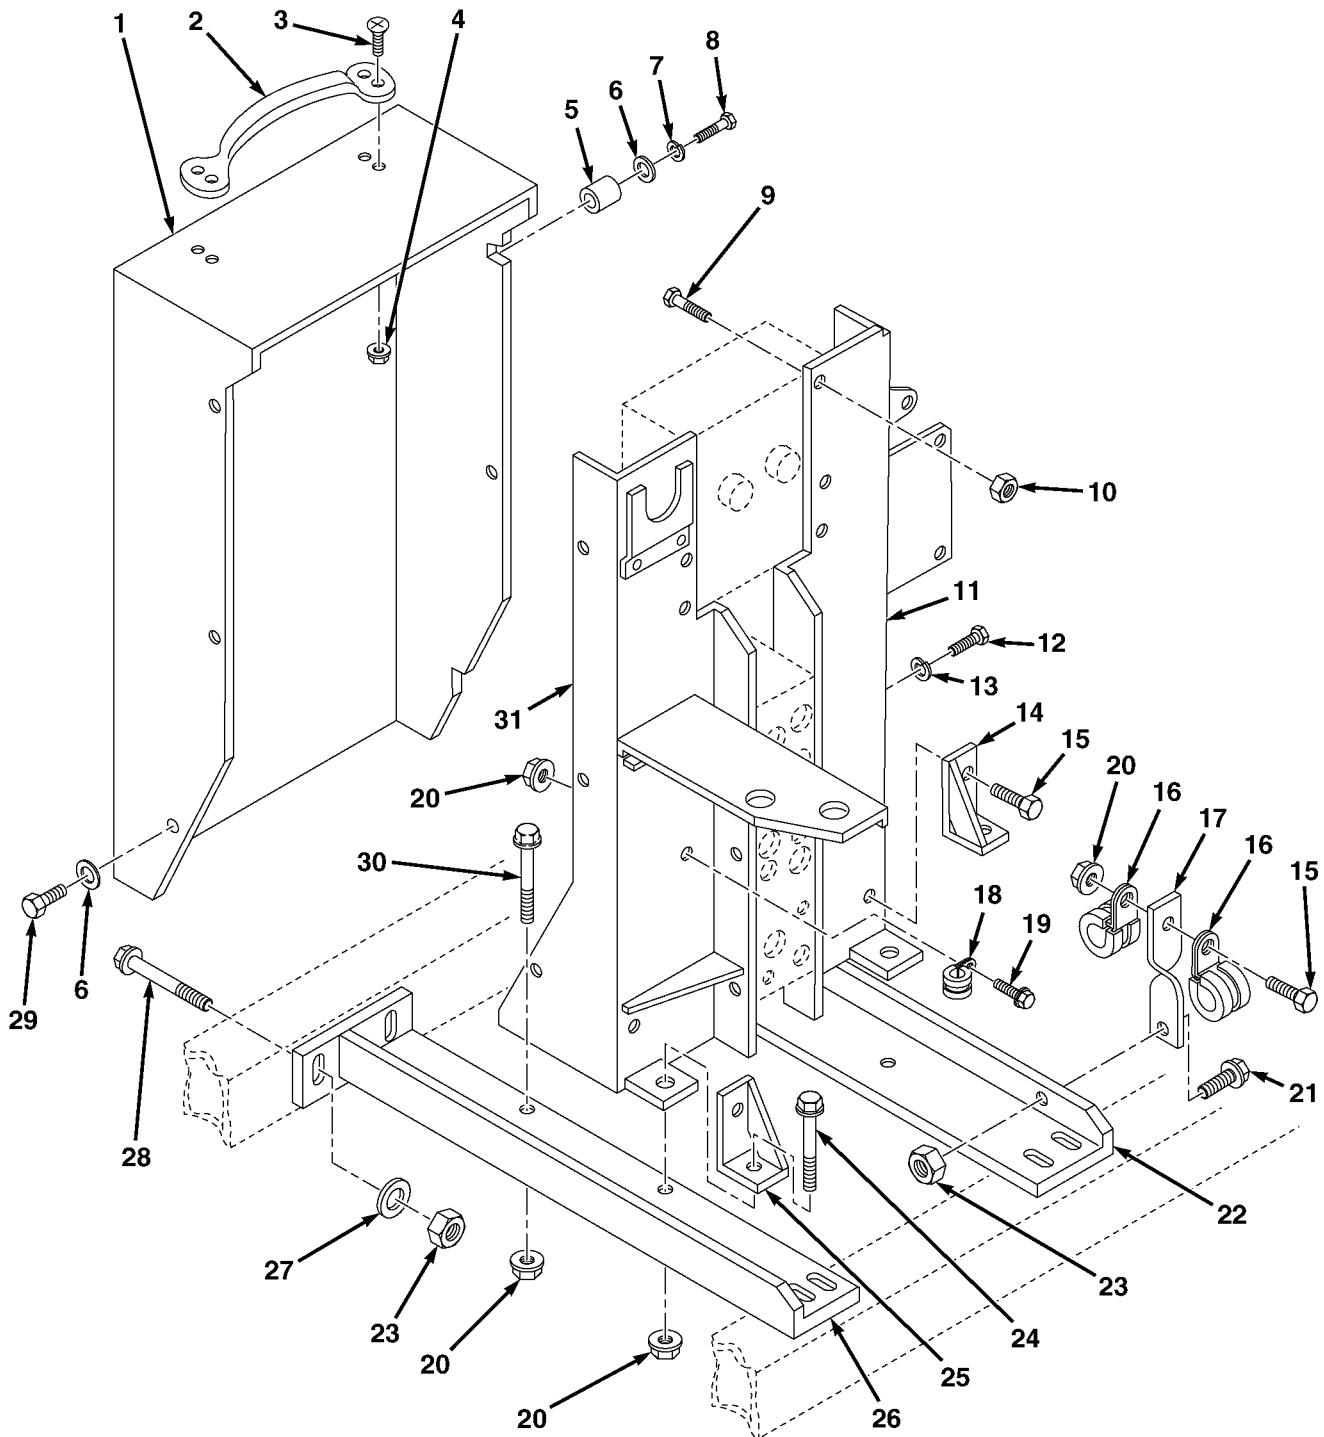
LHS MAIN MANIFOLD & JUNCTION BOX MOUNTING
